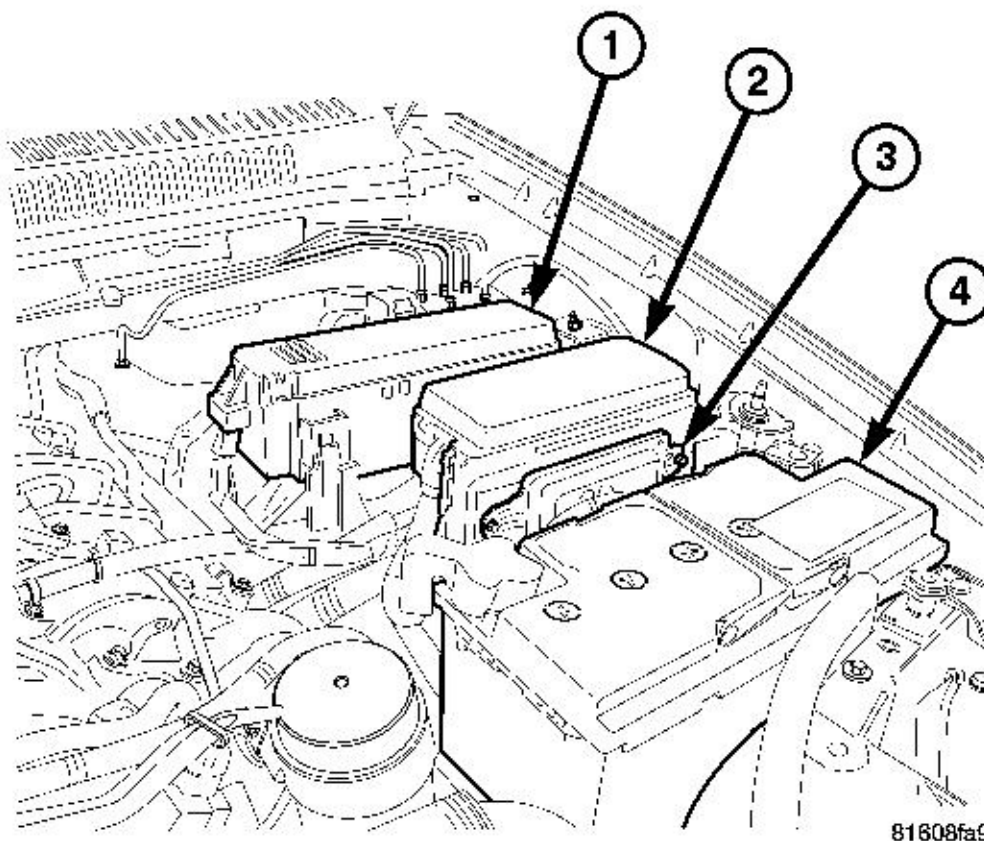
Power Distribution Center, Relay Center, Front Control Module & Battery
